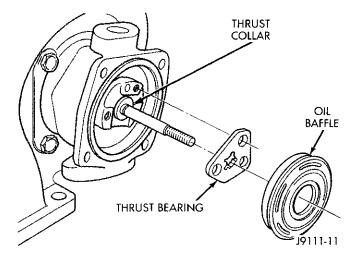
Oil Baffle, Thrust Bearing and Collar
